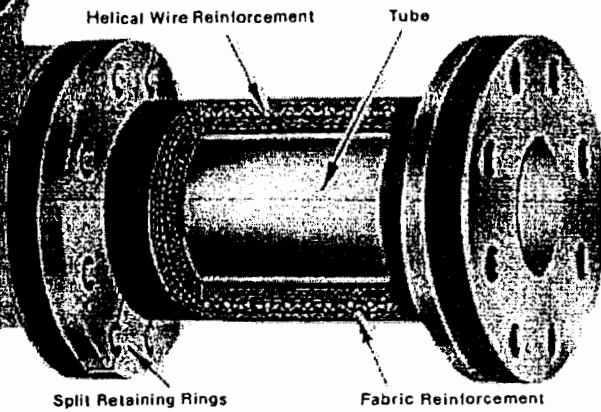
Cross Section View Of Flanged Type Flexible Rubber Pipe
